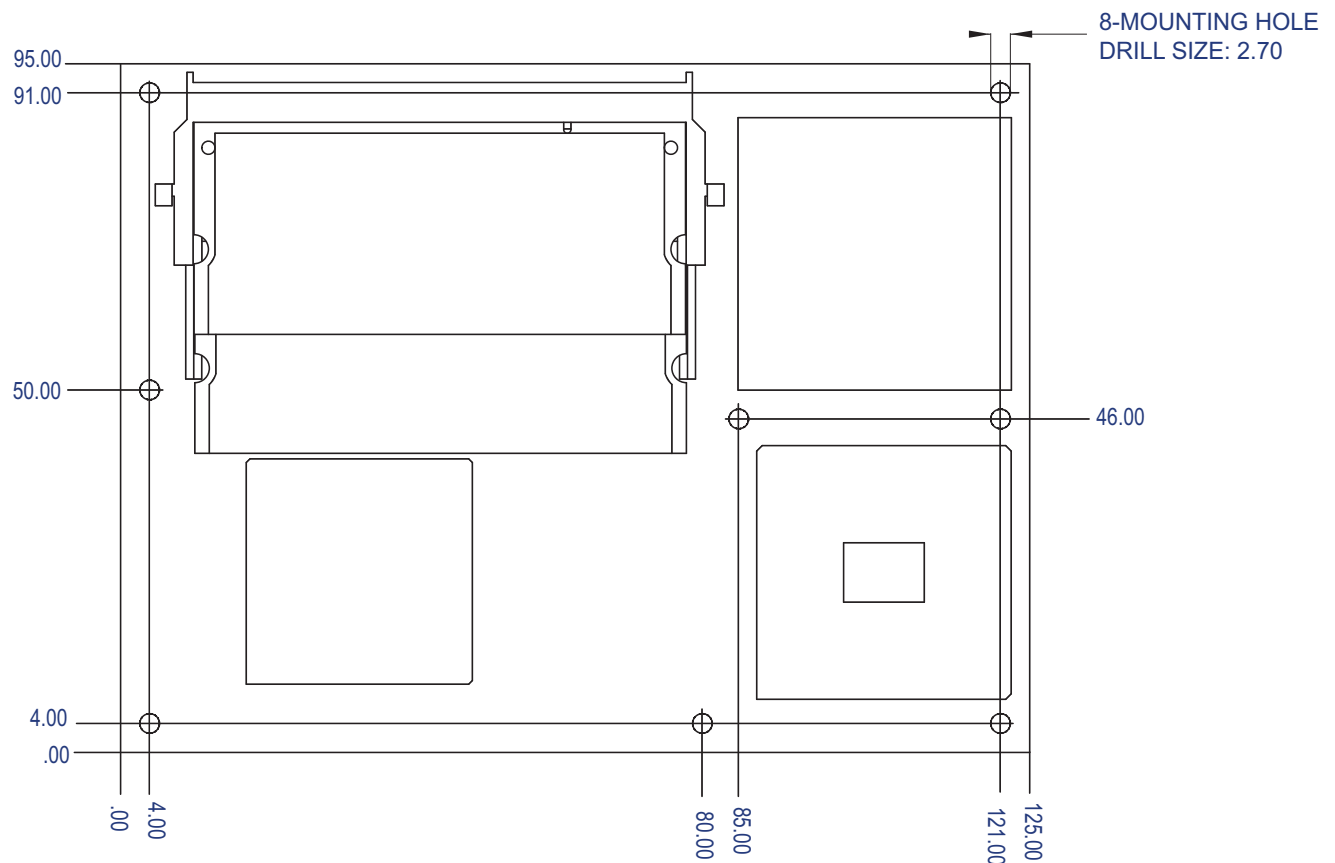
shows the dimensions of other holes used to assemble the heatsink and carrier board.
